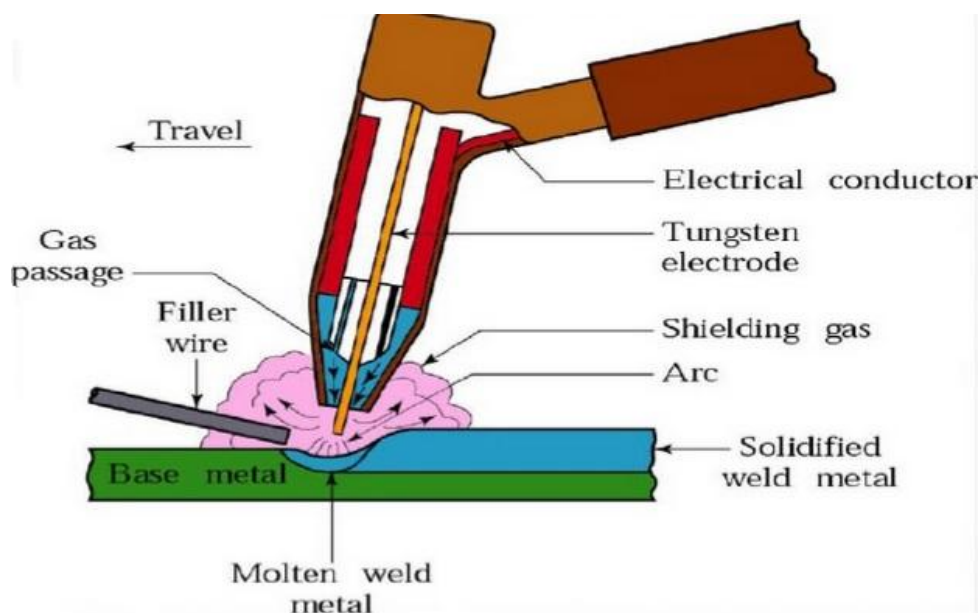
The Gas Tungsten Arc Welding Process (KaIpakjian, S., 2001)
